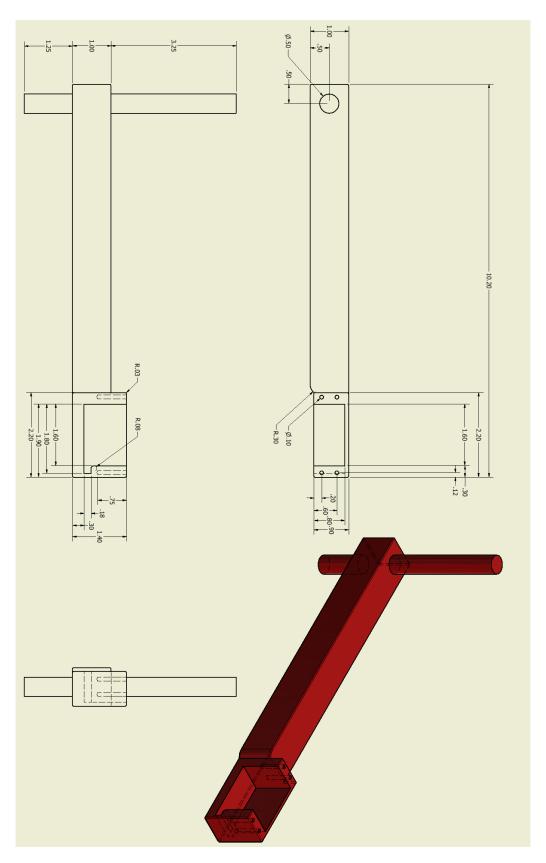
Arm Segment 2 Mechanical Drawing (Units: in)
